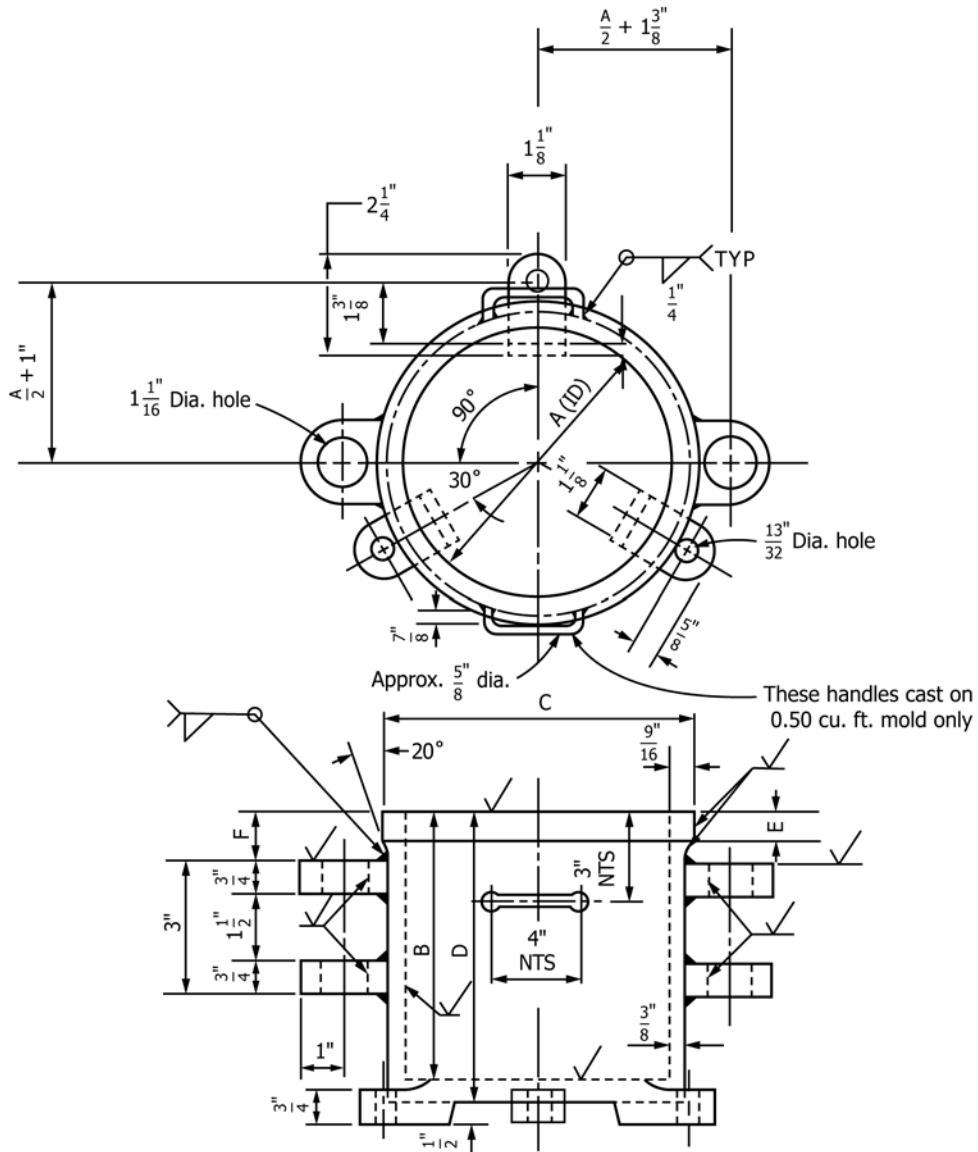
Schematic Drawing of a Typical Mold Assembly
